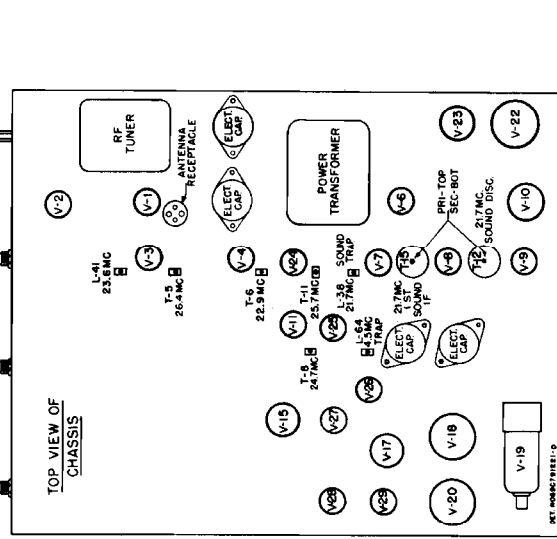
CHASSIS TS-15 TUBE & IF ALIGNMENT LOCATIONS
